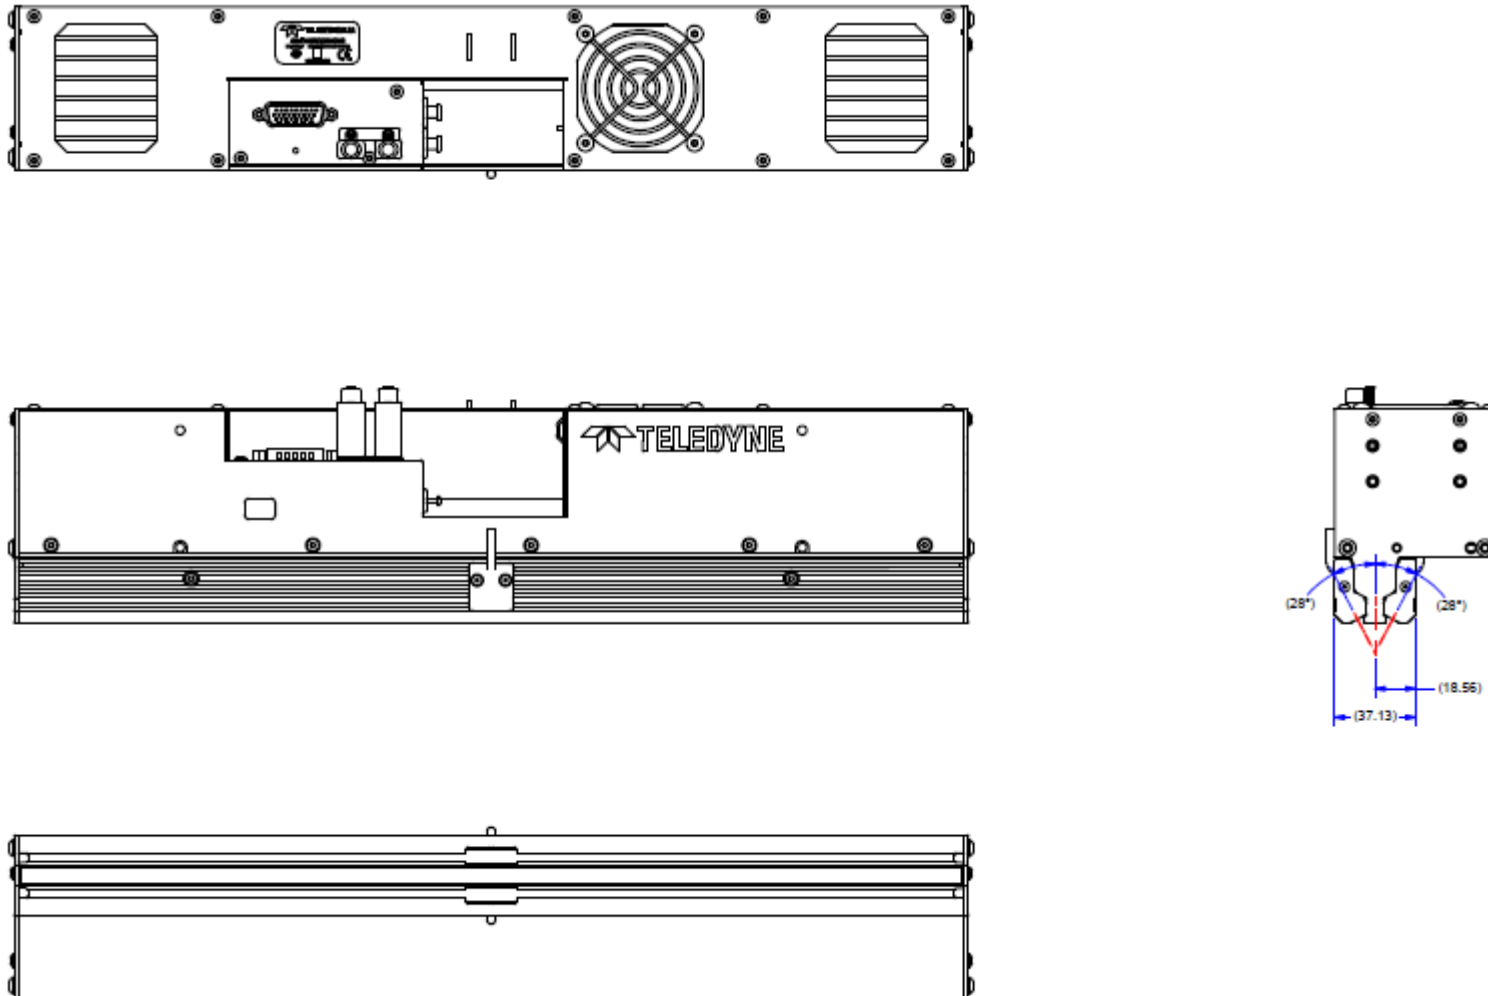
AX-FM-04B12A-00 & AX-FC-04B06T-00 400MM Mechanical Drawing (with optional LEDs)
